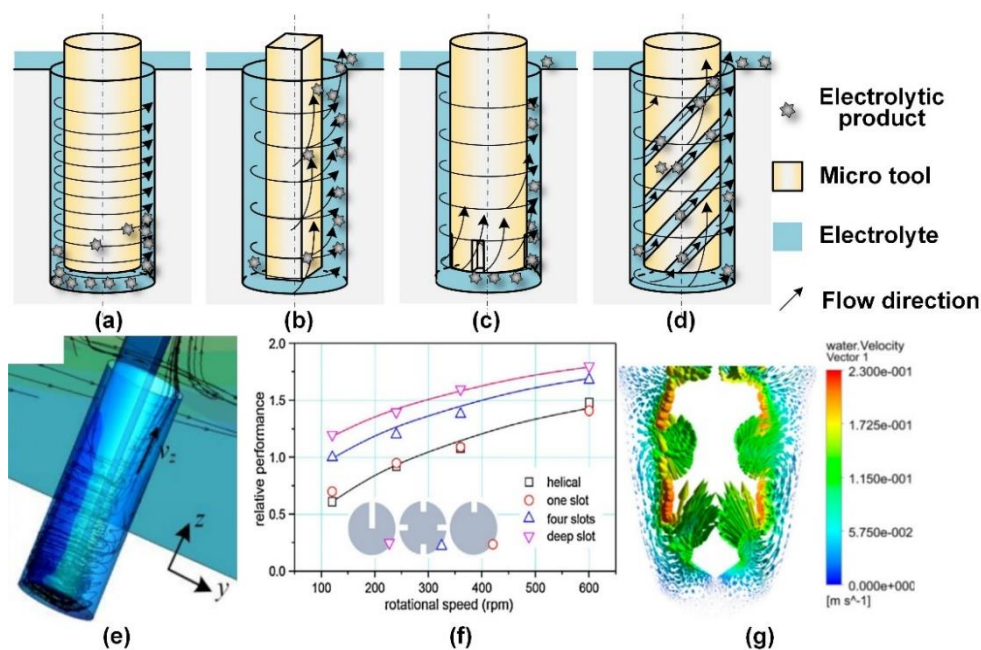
Schematic diagram of electrolyte flow using (a) A cylindrical tool; (b) An edge-cutting tool; (c) A slotted tool; (d) A spiral tool. (e) Streamlines in the machining gap using a trapezoidal cross-sectional tool (Liu et al., 2020c); (f) Comparison of section geometries on tool performance using various slotted tools (Nastasi and Koshy, 2014). (g) Velocity vector distribution diagram of the electrolyte using a spiral tool (Liu et al., 2019a).
